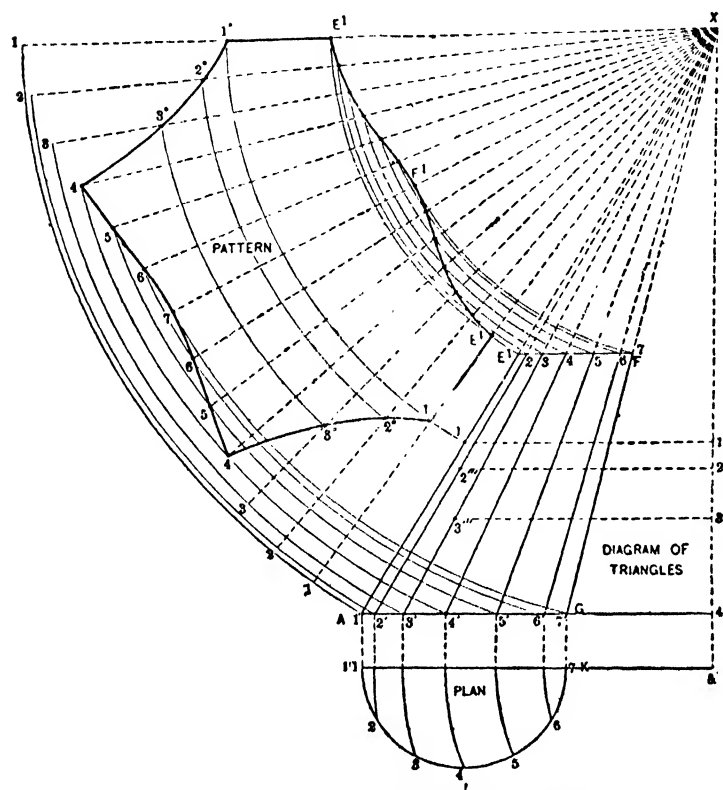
Plan and Elevation, and Pattern for Scalene Cone
